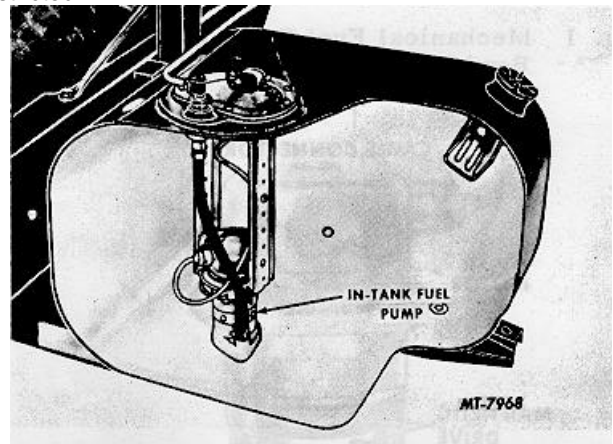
Cutaway View of a Fuel Tank with an Electric In-Tank Mounted Fuel Pump
